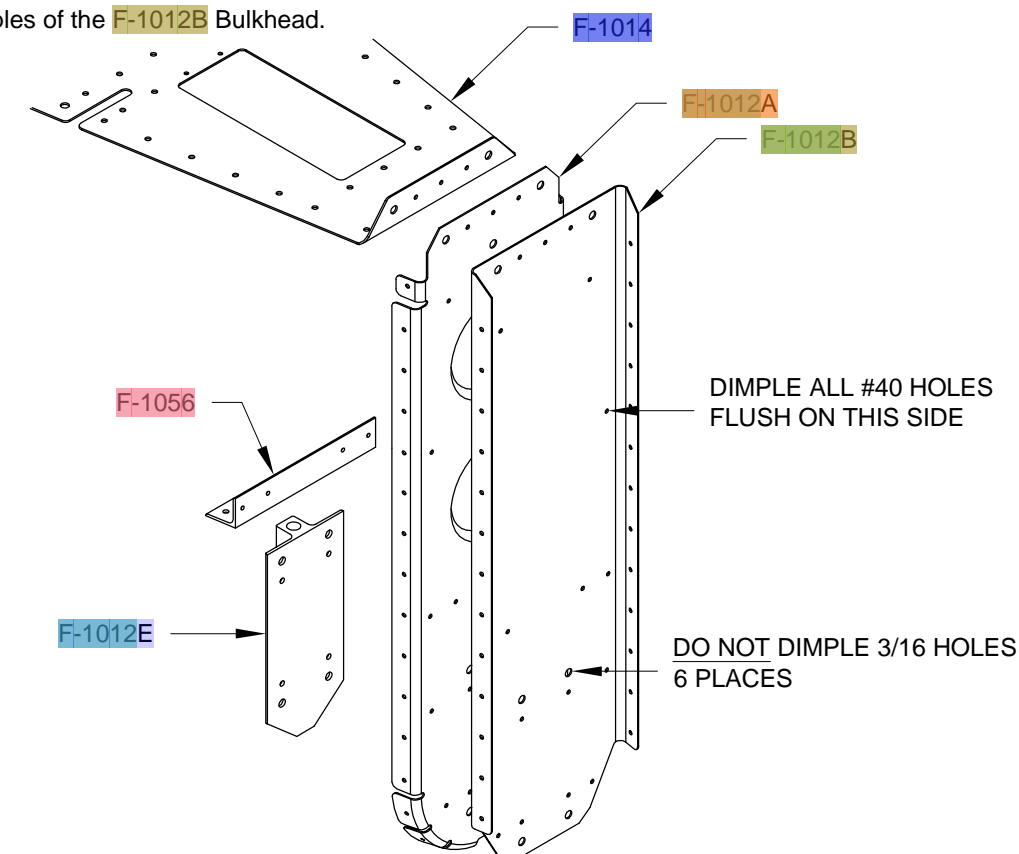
DIMPLING THE F-1012 BULKHEAD AND RELATED PARTS
